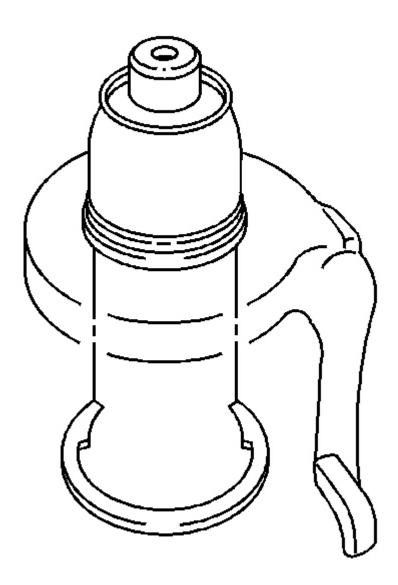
View Of Upper Ball Joint Retaining Clip Courtesy of GENERAL MOTORS CORP.
